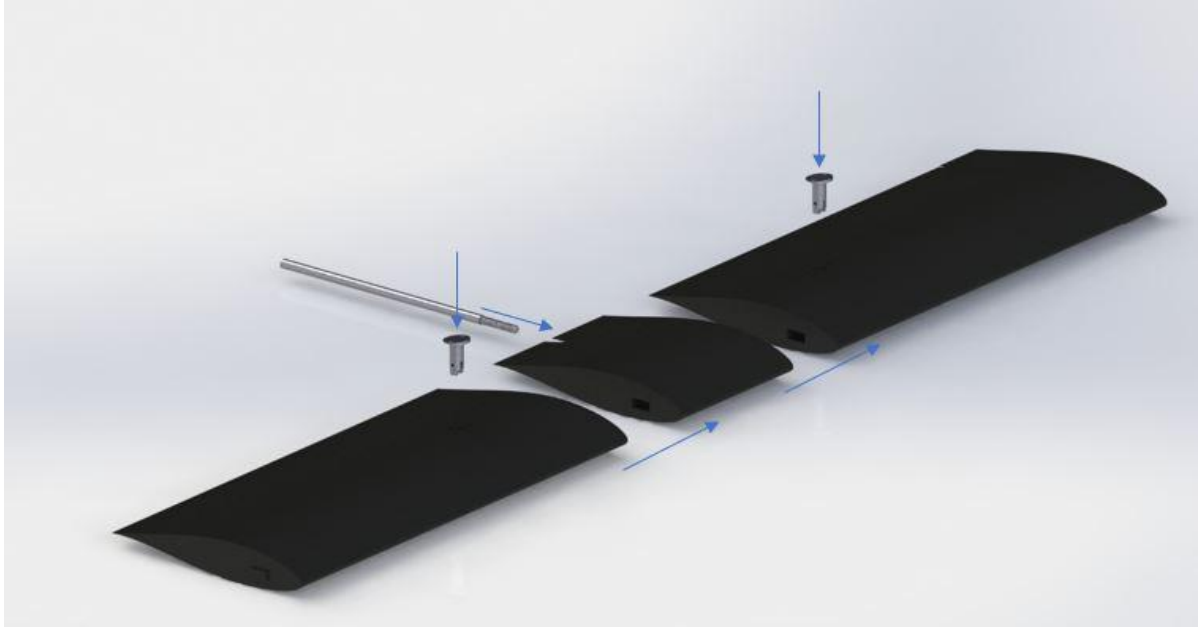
3D CAD render of NACA 63(3)418 wing with horizontal and vertical sting mounts. Wing section spans wall-to-wall and rotates about the $0.5c$ location.
